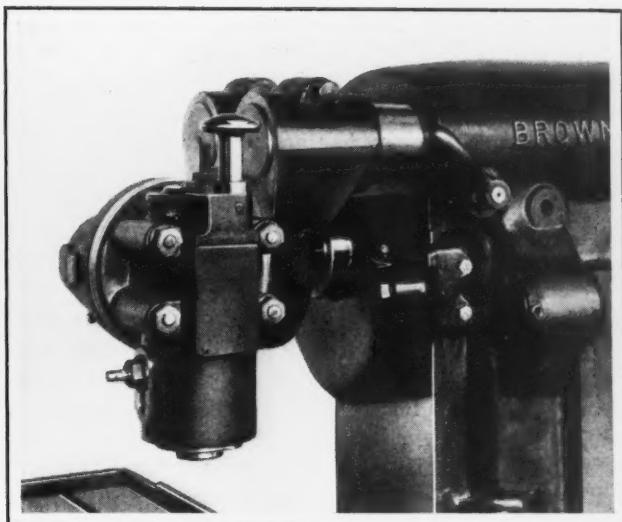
High-speed Universal Attachment for Horizontal-spindle Milling Machines
